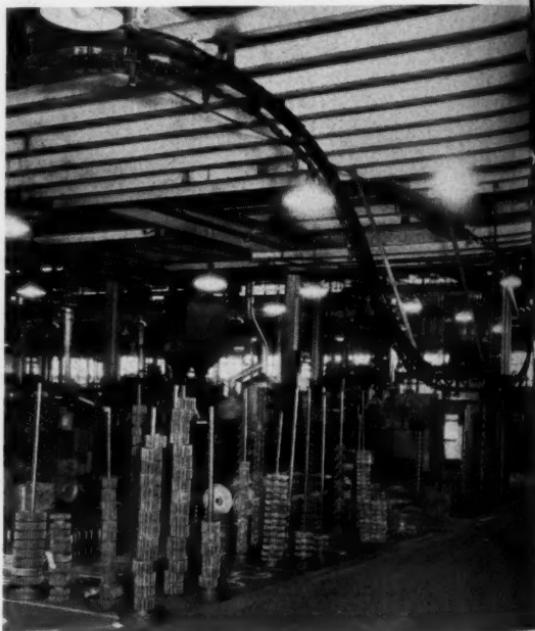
Gears, shafts, and other parts ready to be placed on the overhead conveyor to be moved to the assembly department in another building.
